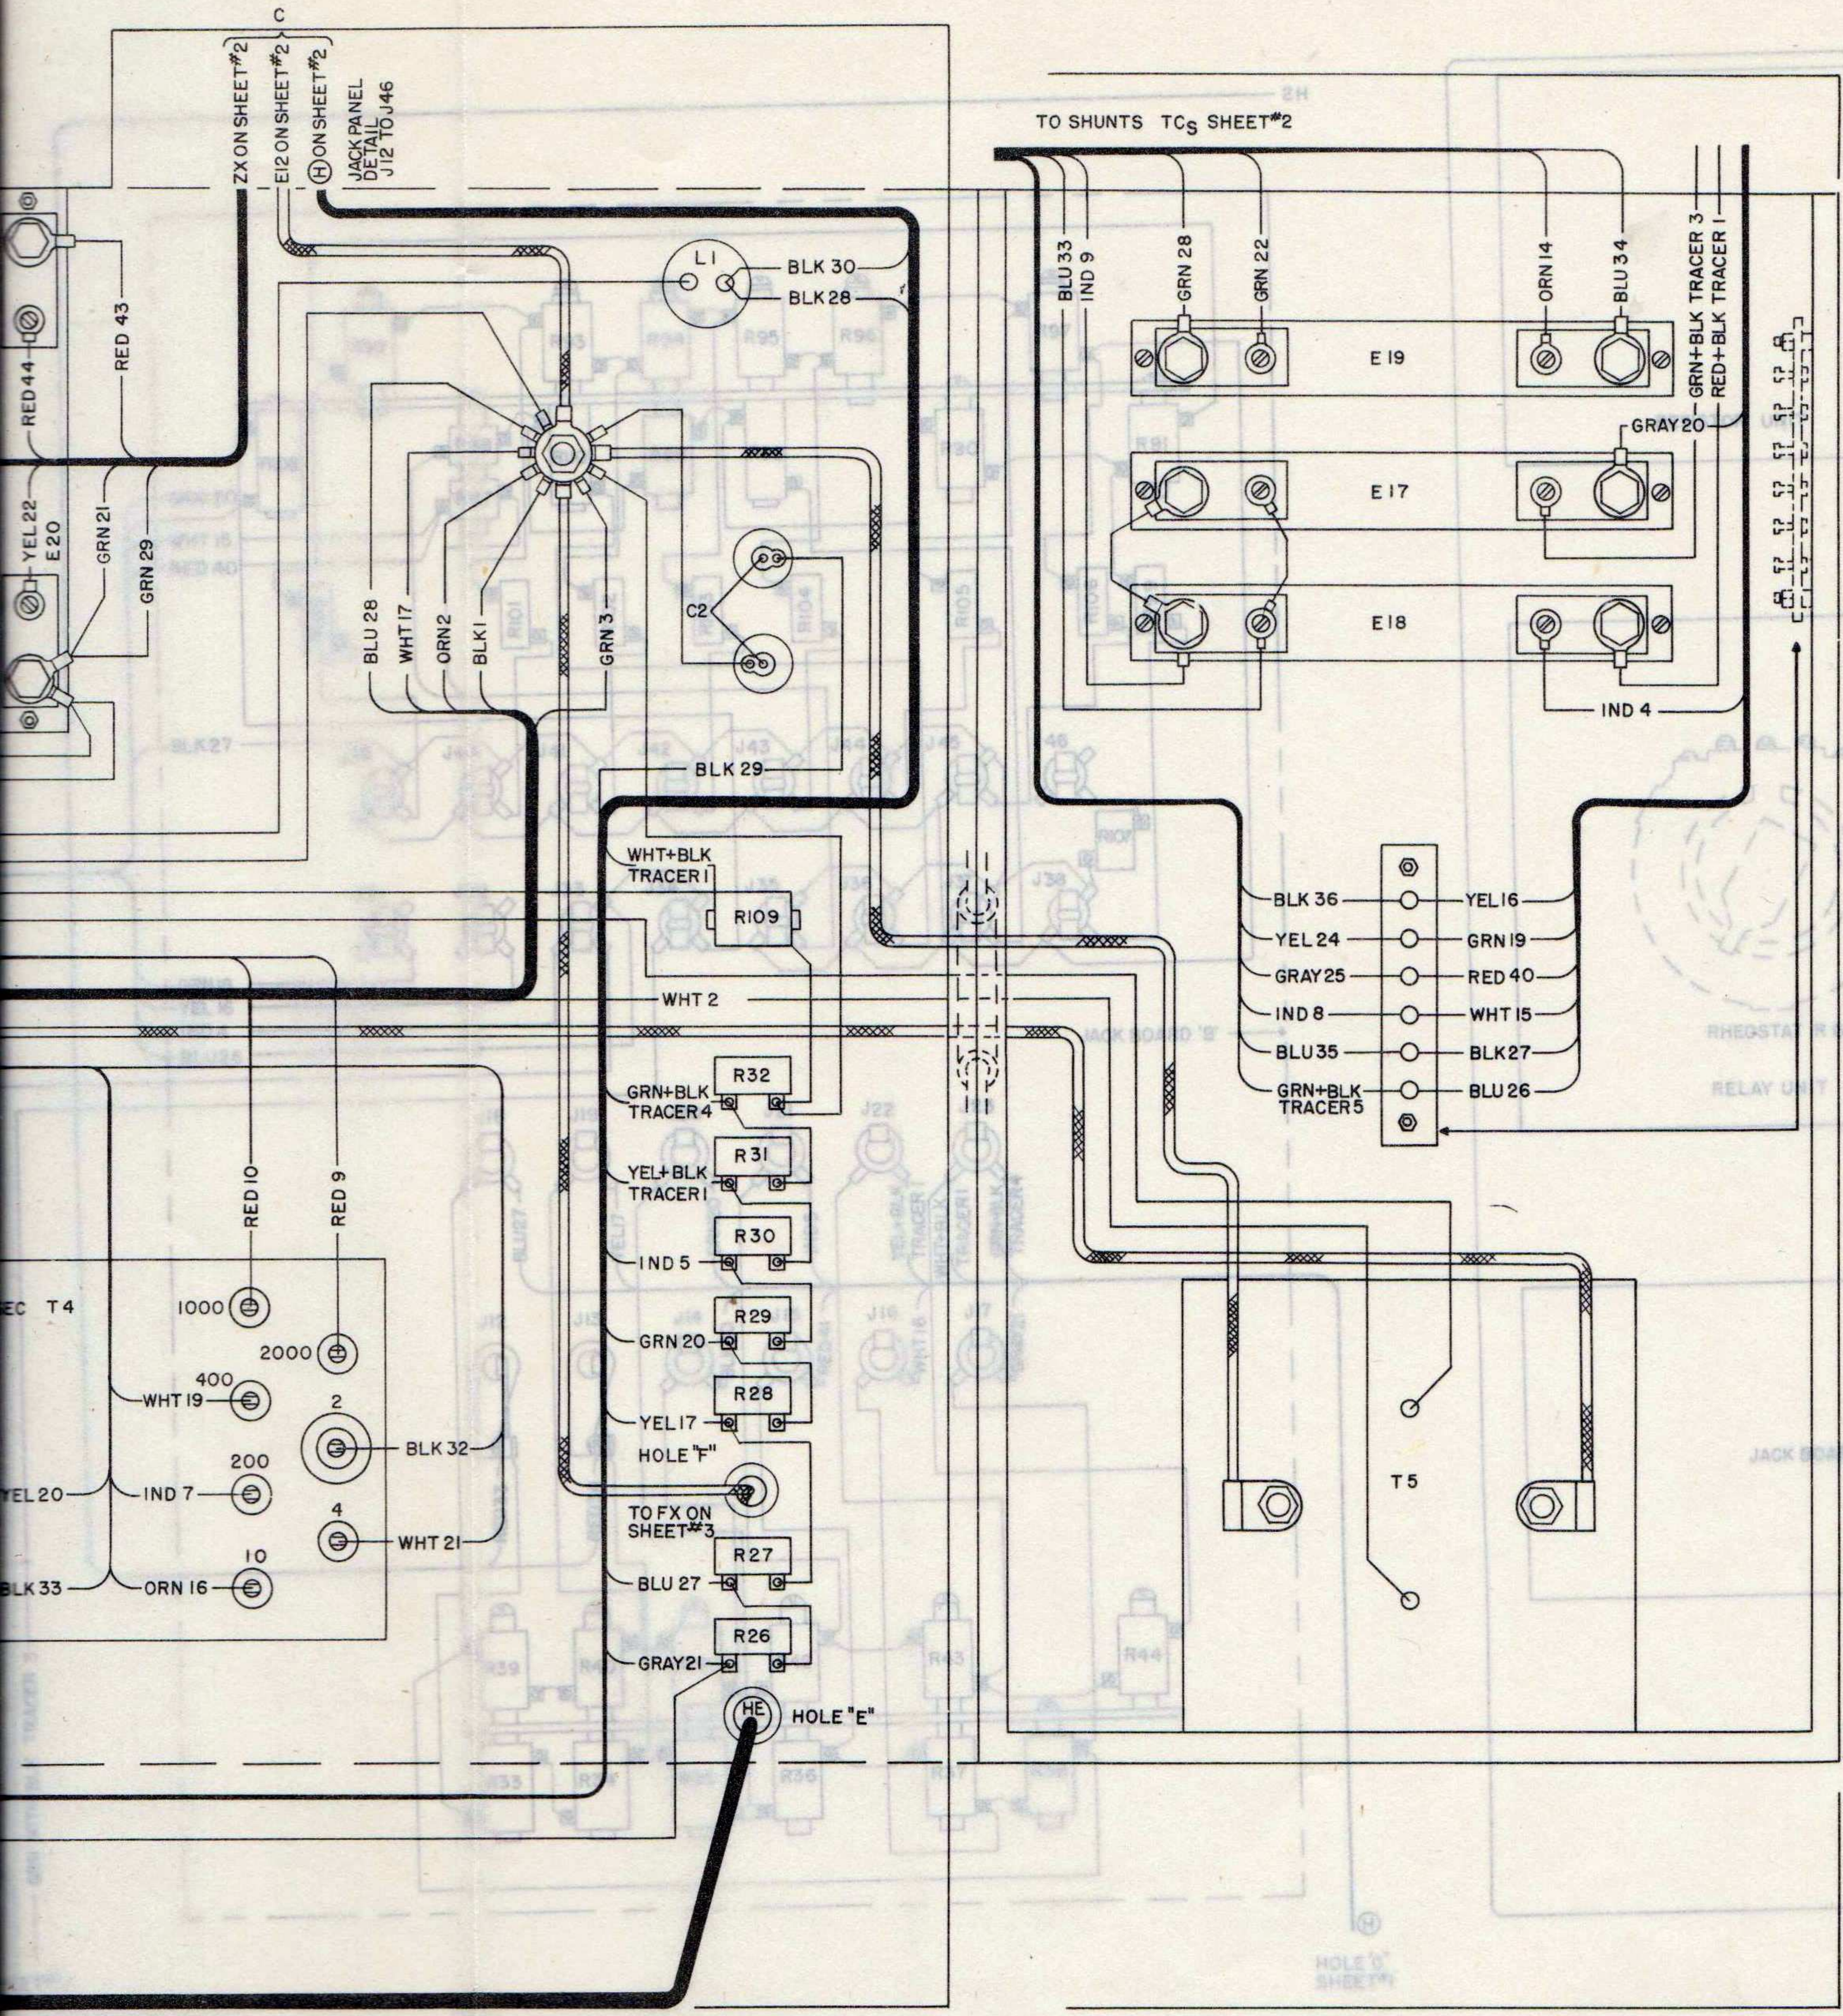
Meter Test Set TS-682/GSM-1, bottom of chassis, wiring diagram.
